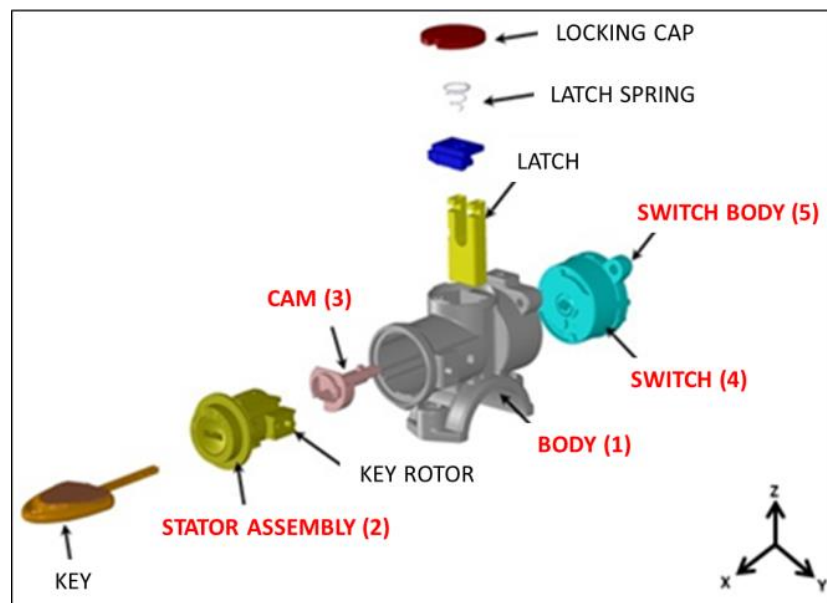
Exploded view of automotive ignition switch with individual parts
